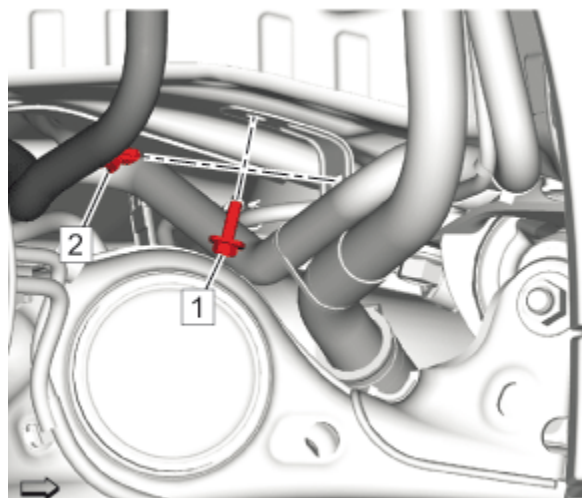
Fuel Tank Filler Pipe Ground Bolt And Wiring Harness Clip
